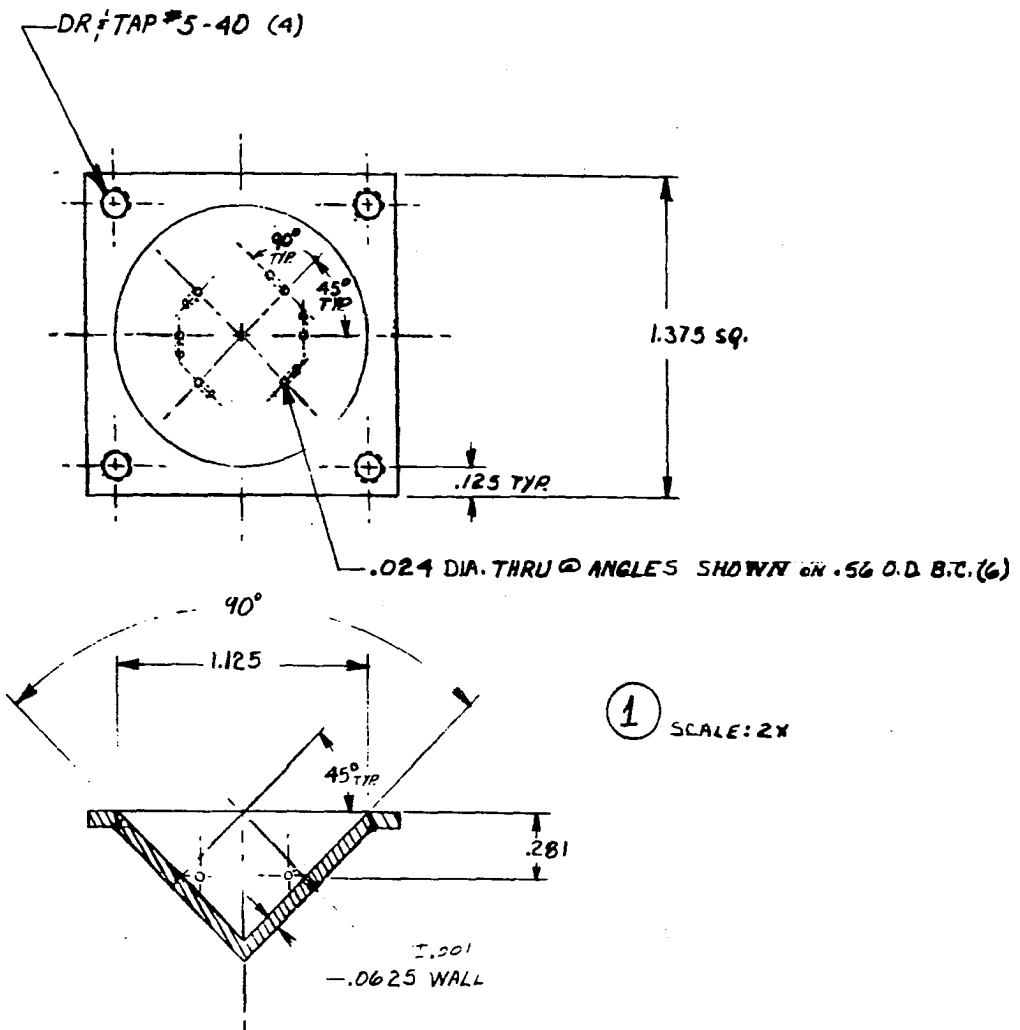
Design of stator used to drive rotors of the Beams-Andrew type
